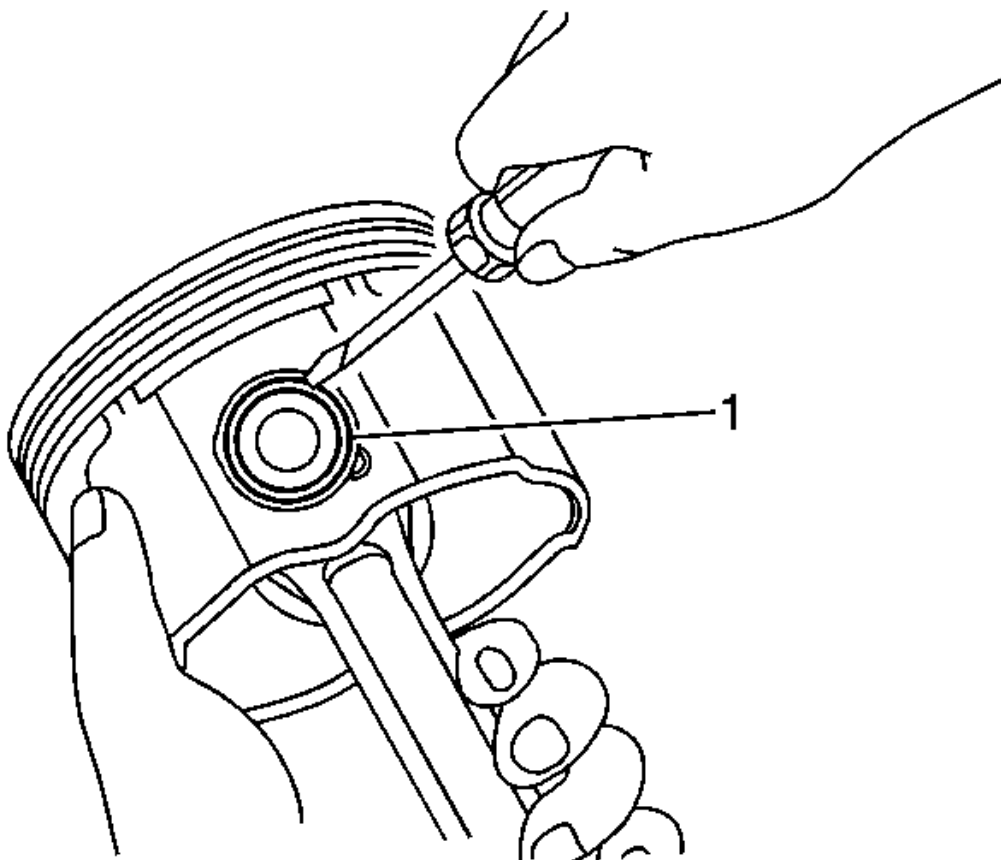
Illustrating Piston Pin Snap Ring Removal
